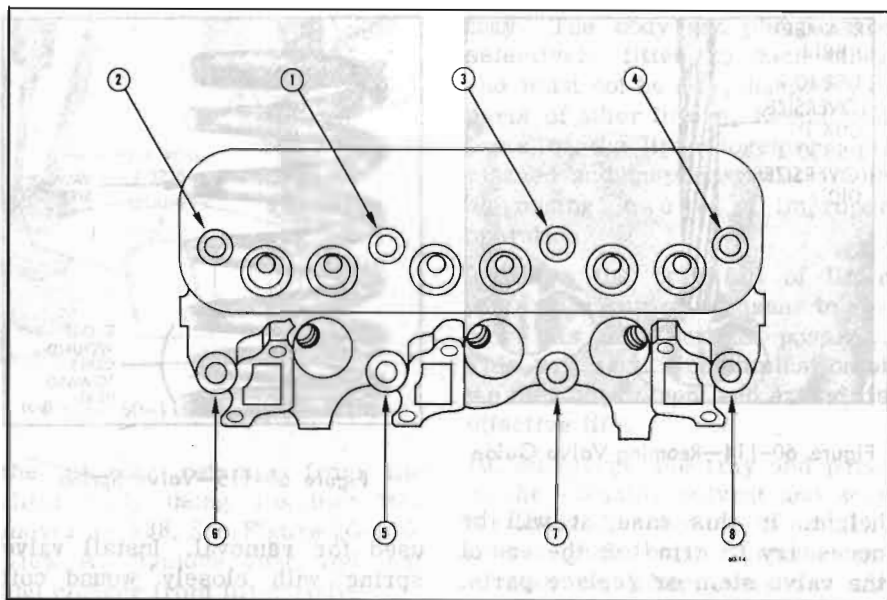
Cylinder Head Bolt Tightening Sequence
